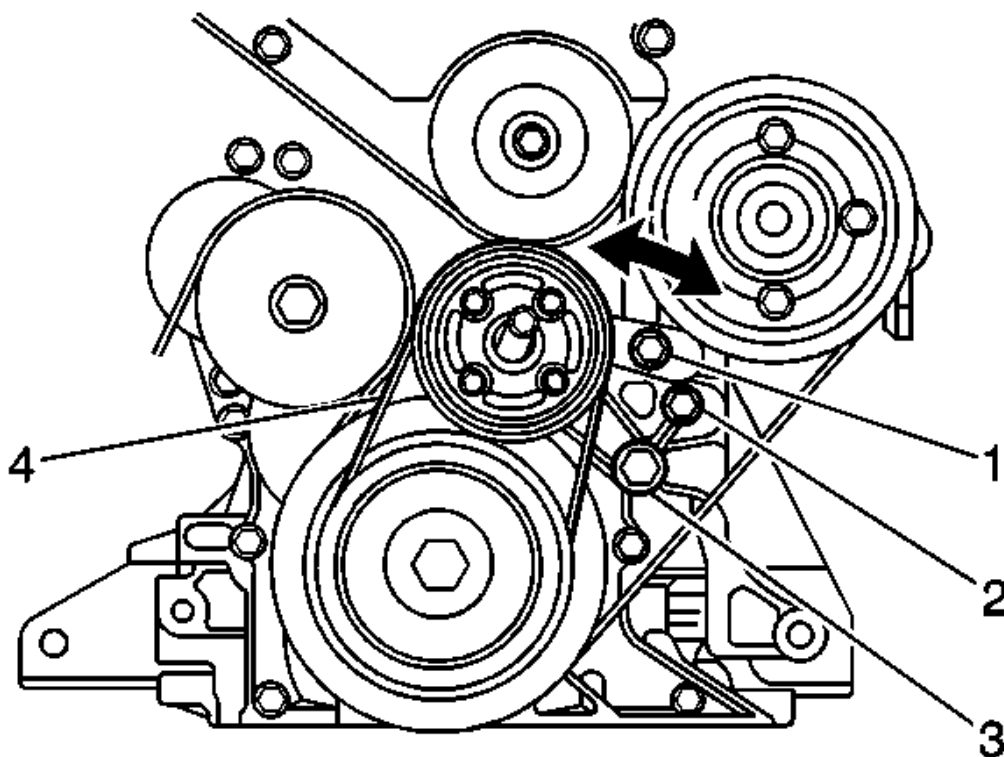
Drive Belt Routing & View Of Tension, Adjusting & Pivot Bolts
